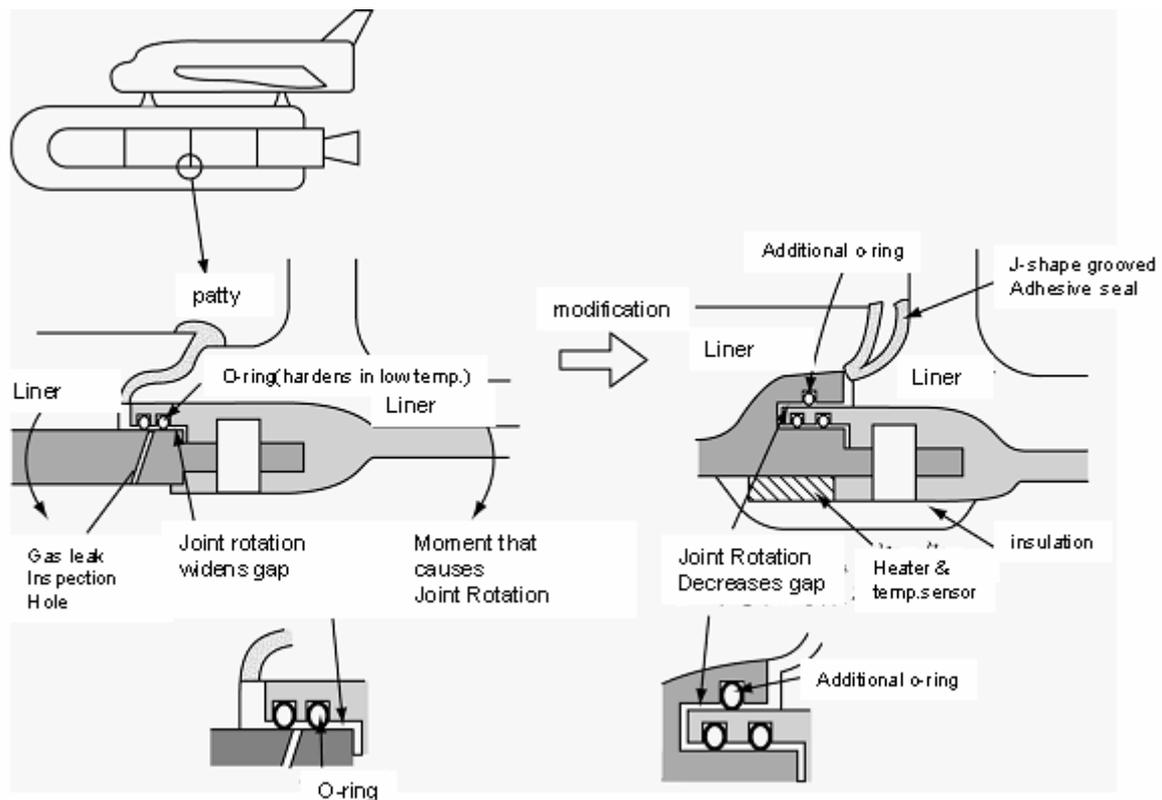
, Fuel Leak Prevention after the explosion of Space Shuttle Challenger [5]
